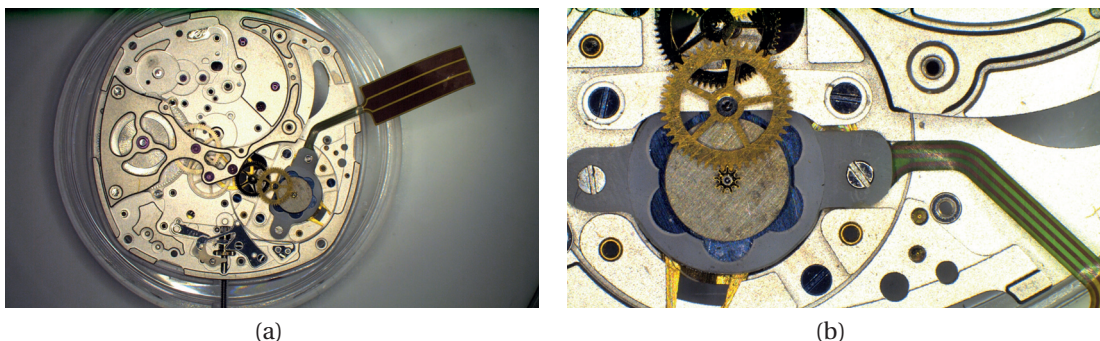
Generator assembled into the watch movement: (a) complete view and (b) detail.
